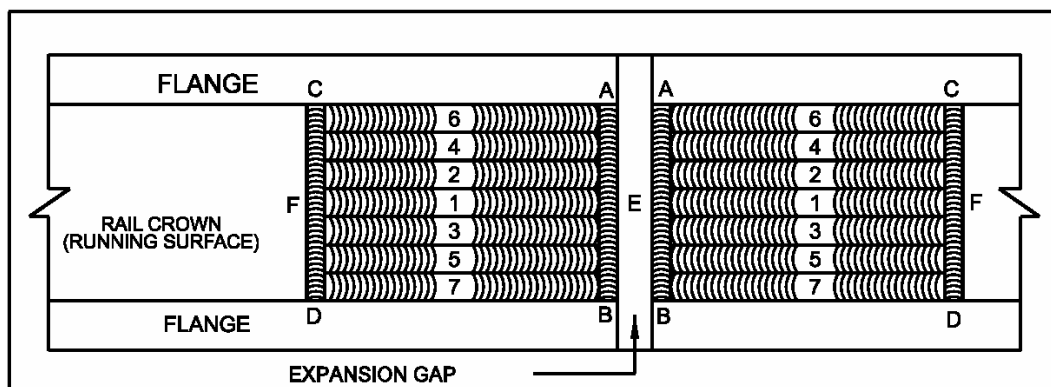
Staggered welding method for battered rail ends (except for semi-automatic welding processes).
